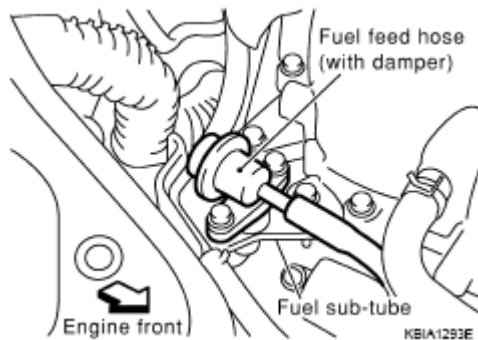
Identifying Fuel Feed Hose (With Damper)
